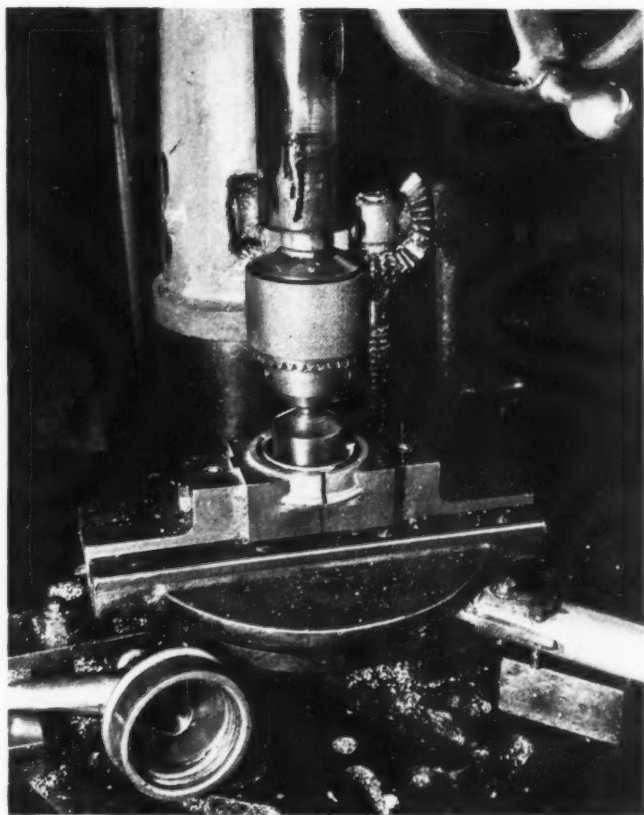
Holding a Threaded Die-casting while Machining a Tapered Seat
